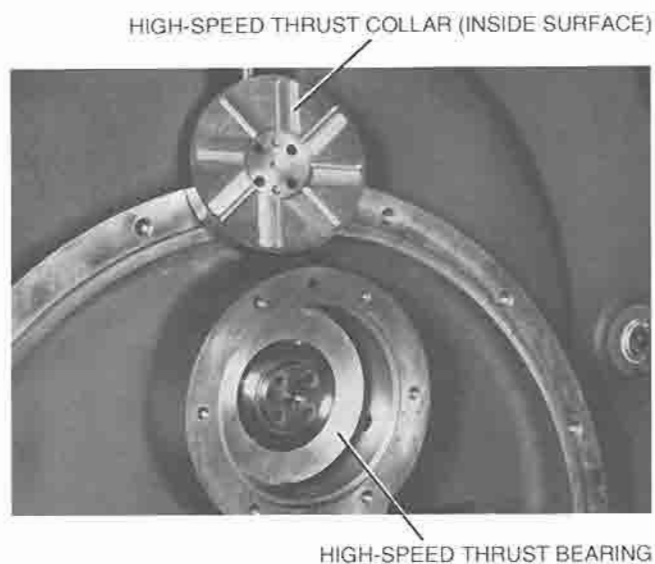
REAR HIGH-SPEED THRUST BEARING
